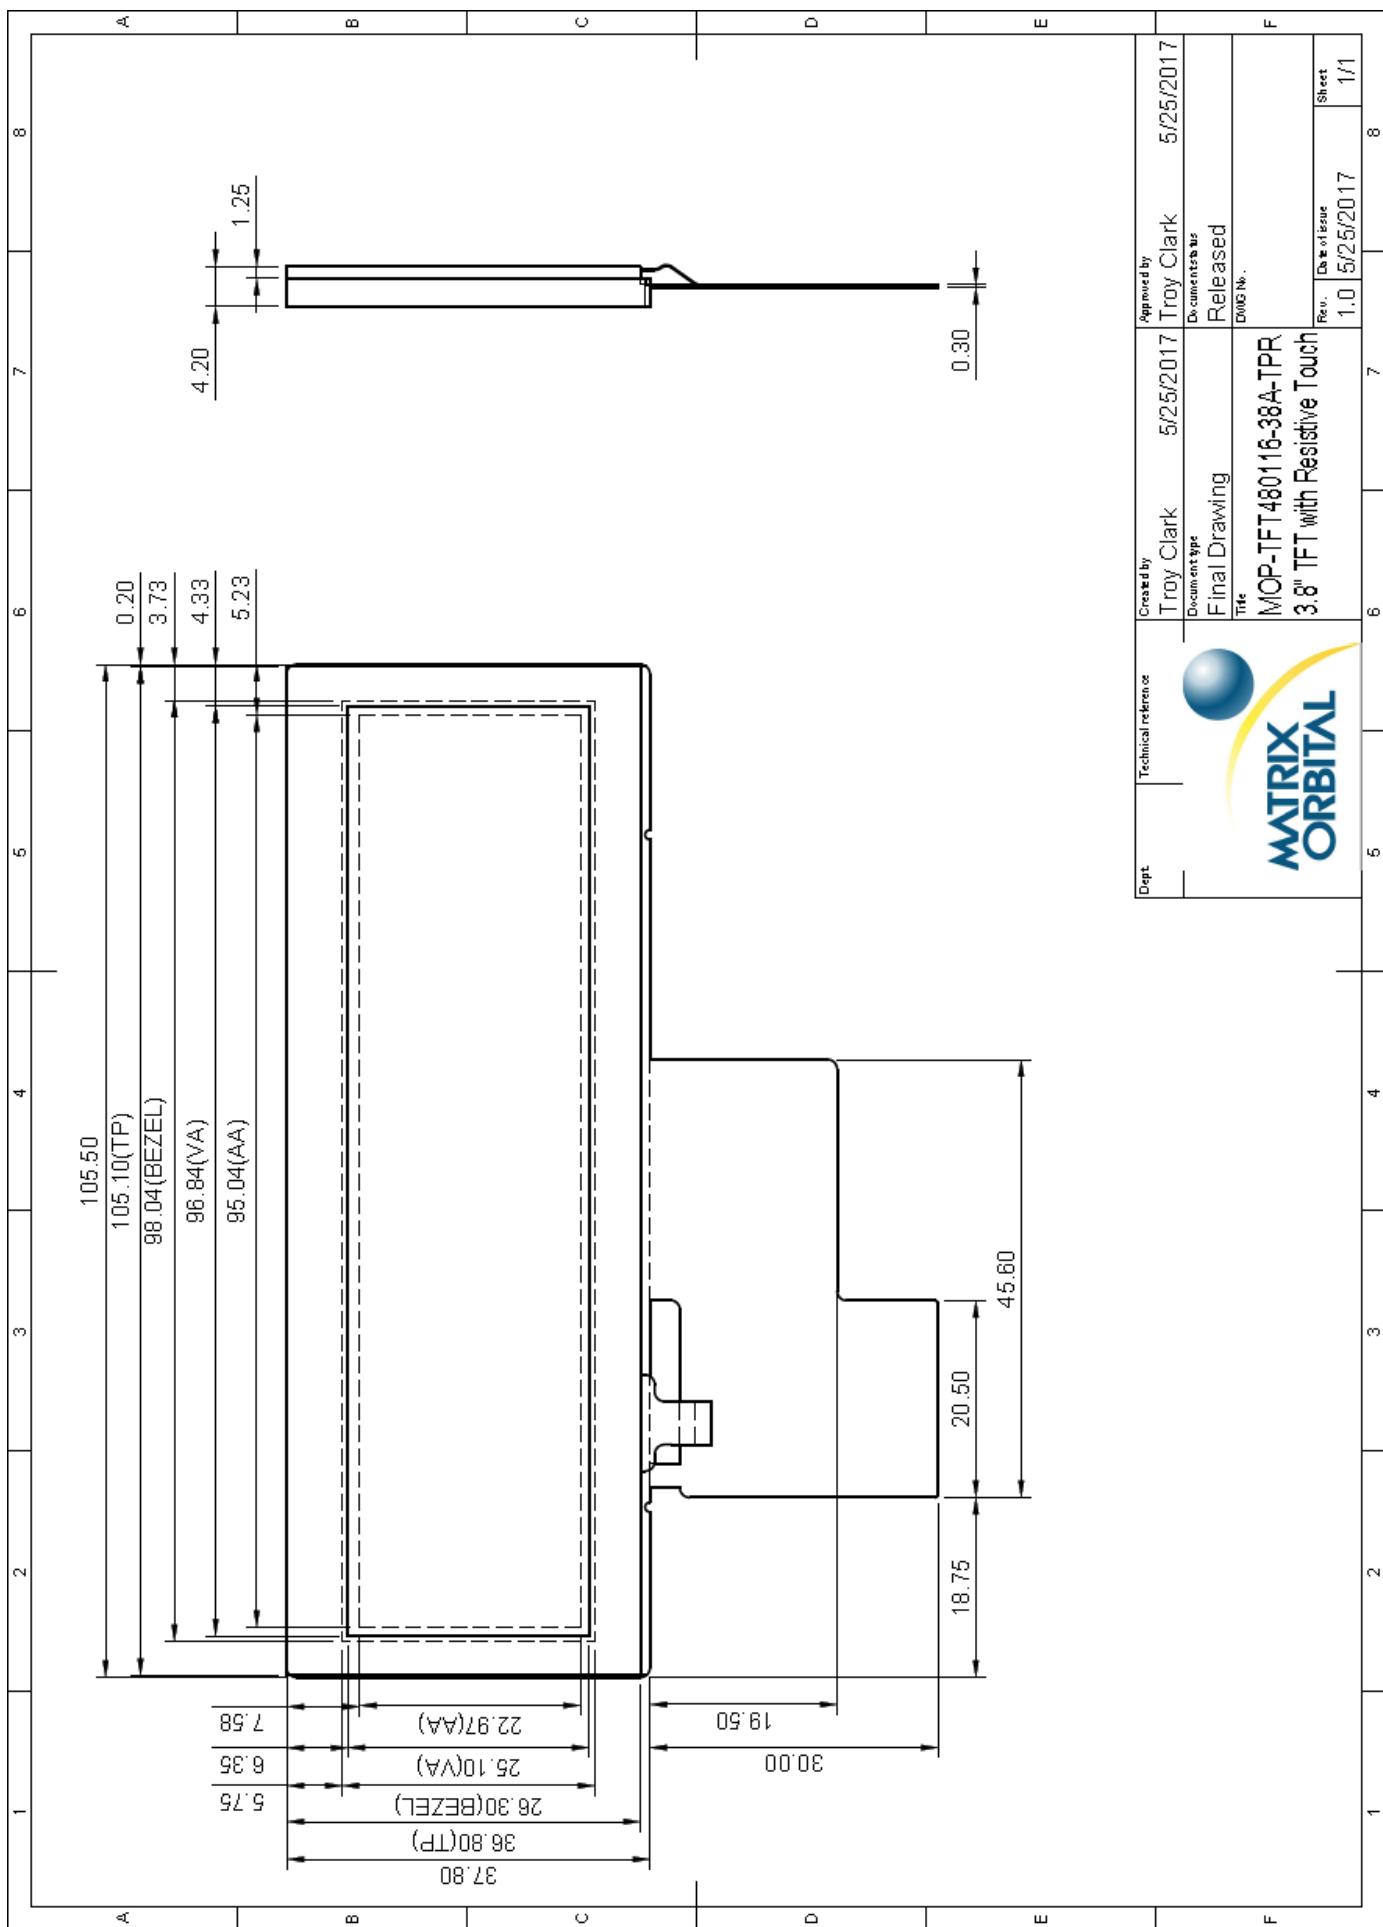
MOP-TFT480116-38A-BLH-TPR Drawing
